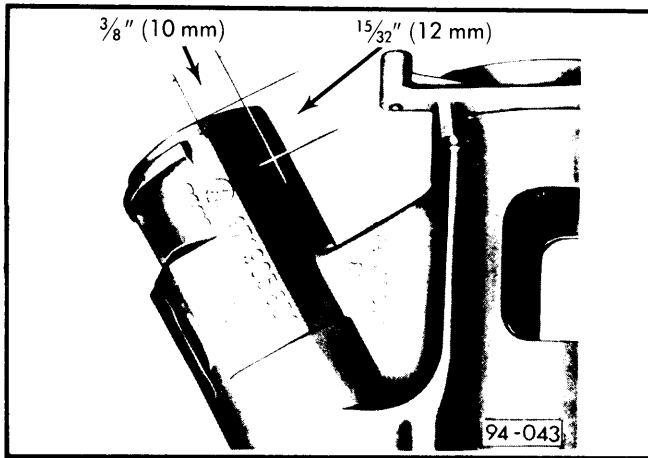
Measurements for Drilling into Steering Lock Cylinder
